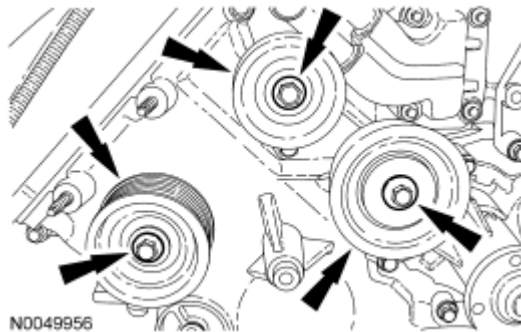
Locating SC Drive Belt Idler Pulley Bolts
